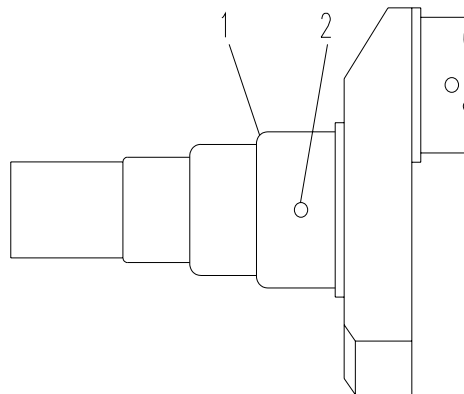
Crankshaft Bearing 1 (Sheet 2)
